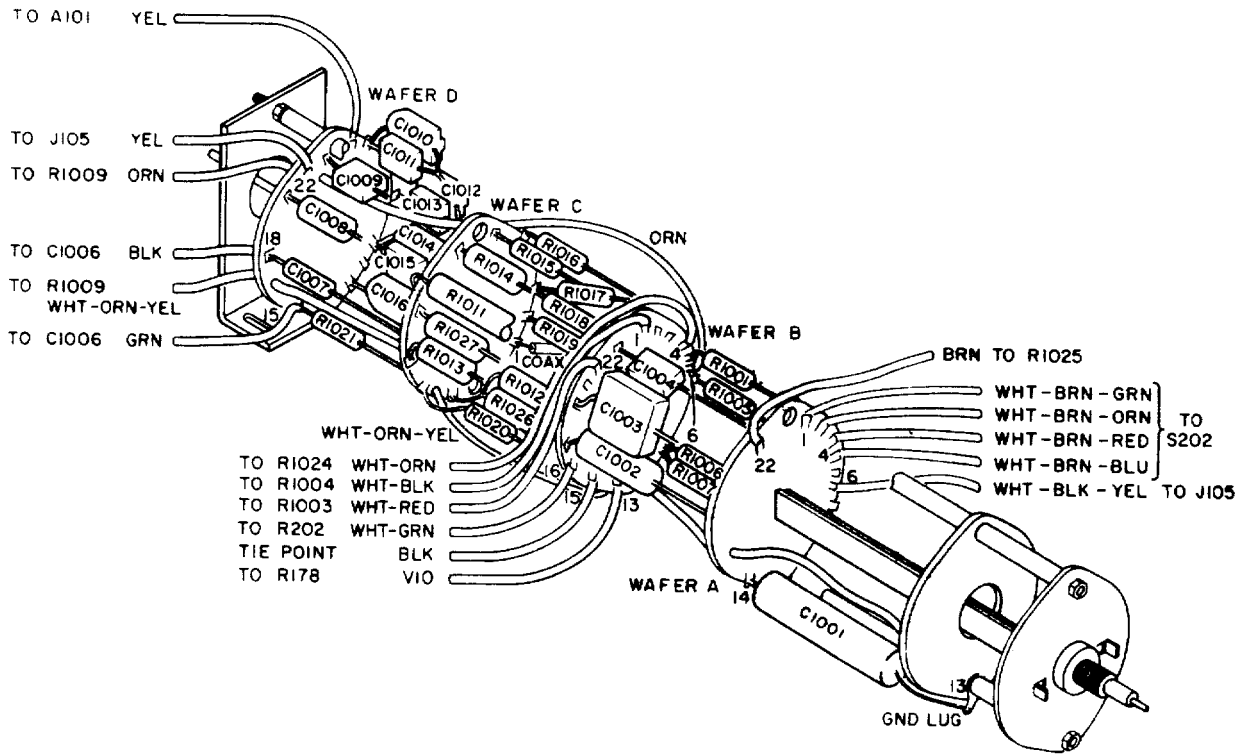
Sweep Time Switch Assembly, Location of Parts
